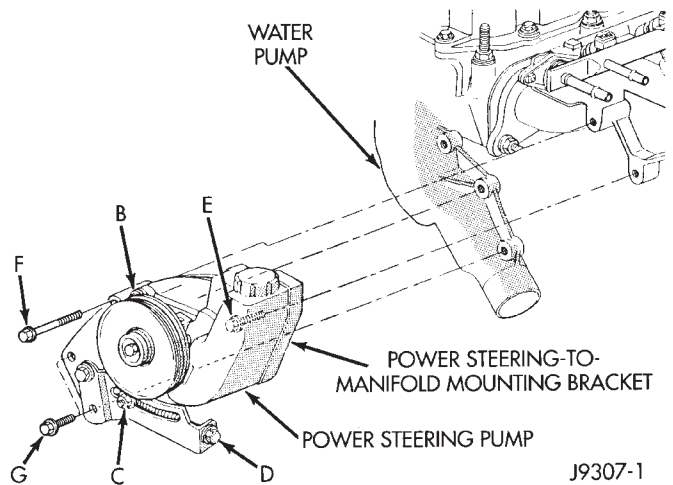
Bracket Mounting Bolts—4.0L Engine
